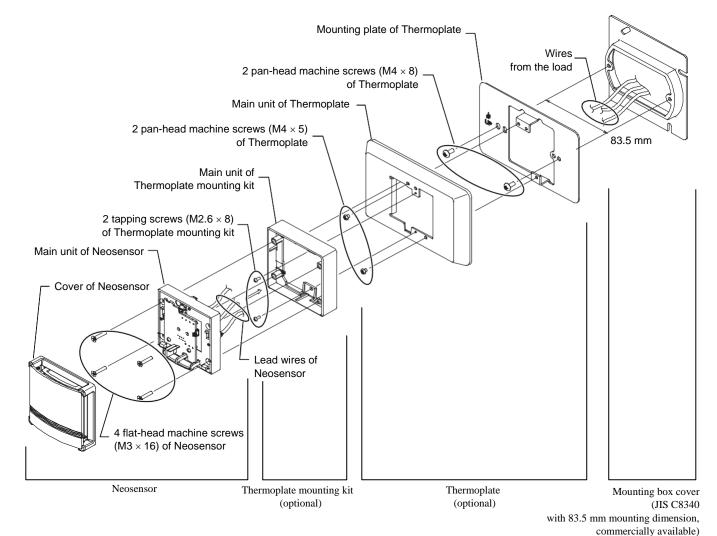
Installation: Neosensor with Thermoplate mounting kit (on Thermoplate)
